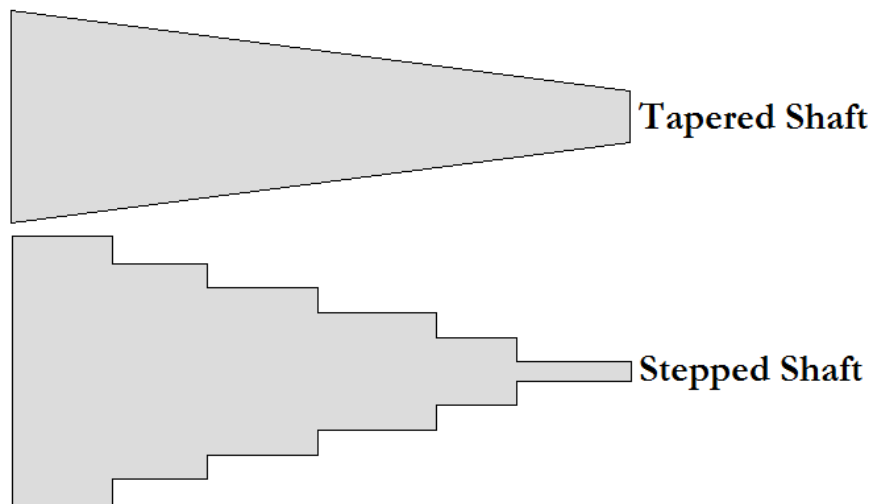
Flat sheet metal cut-outs used to make welded shafts.
